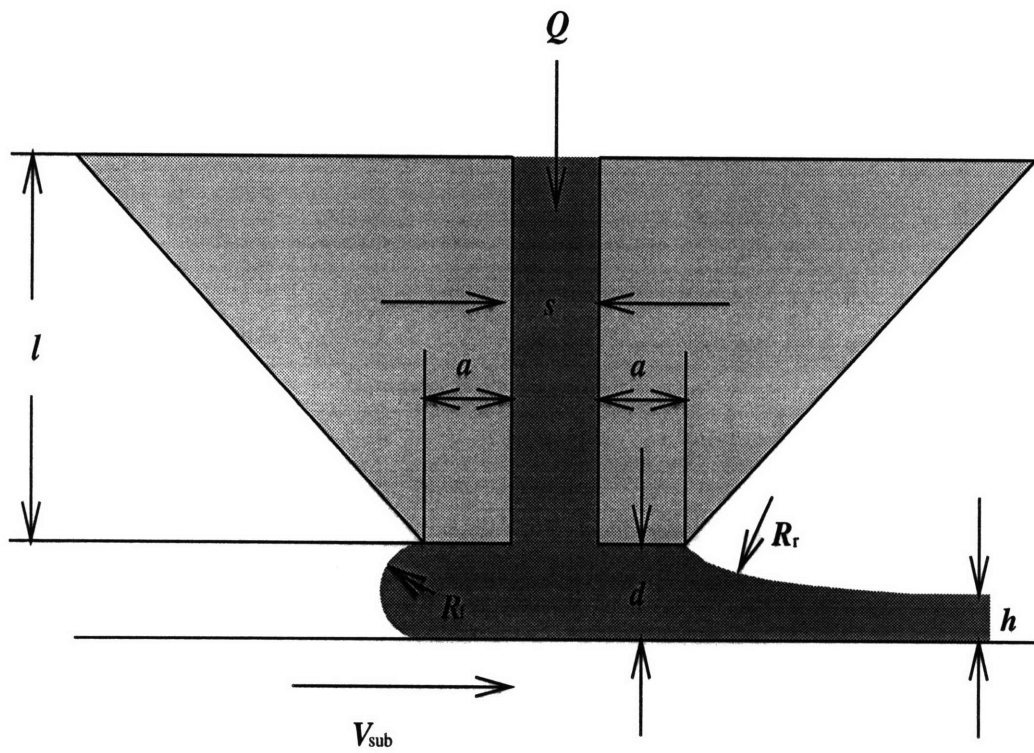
Dimensional parameters of extrusion-slot coating.
